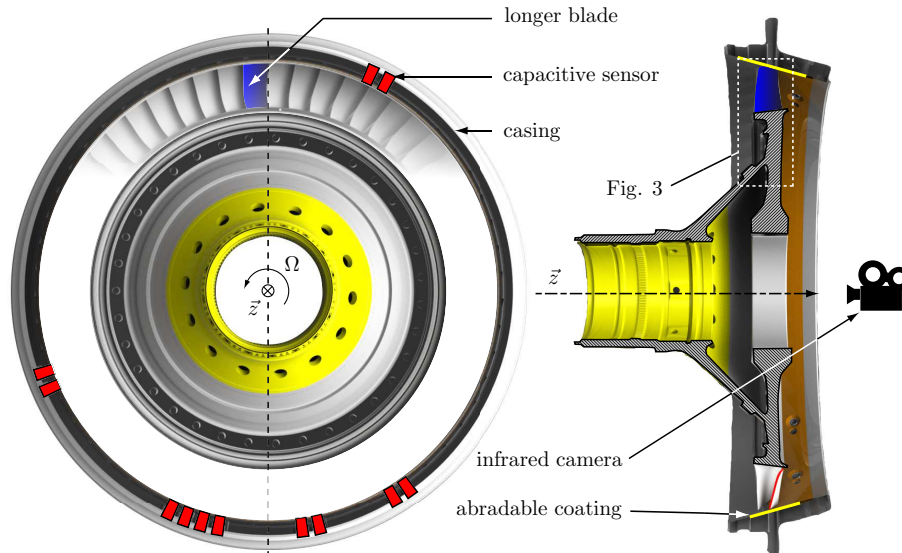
front view and cut view of the high-pressure compressor second stage used in the experimental set-up
